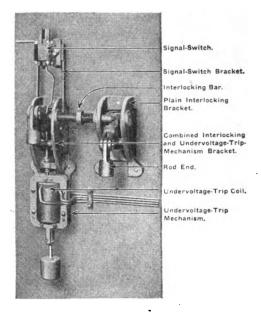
Rear of Single-Handle Coverplate of Two Interlocked Breakers—Showing Arrangement of Interlocking, also Showing Accessories Installed on One Coverplate
